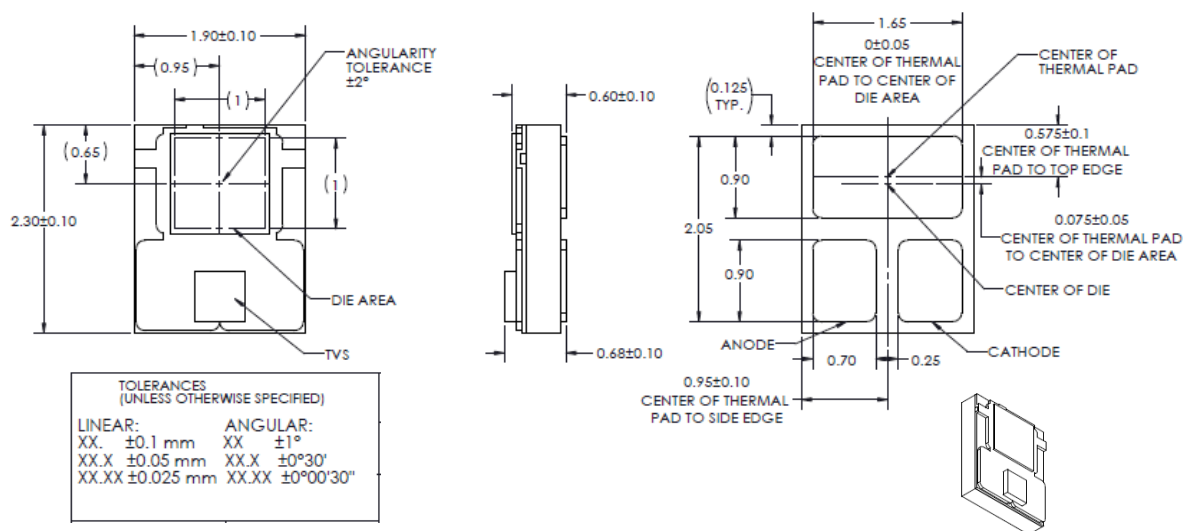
Mechanical Dimensions for LUXEON F Cool White.
